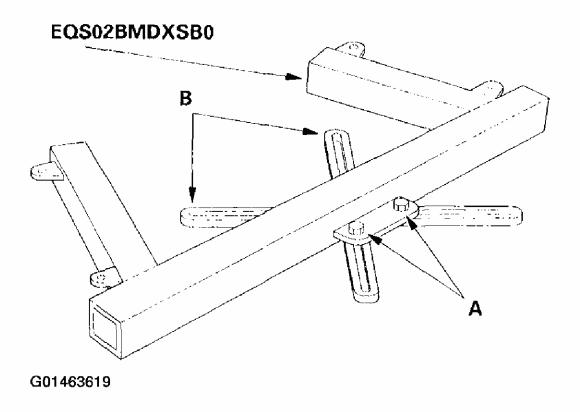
Loosening The Four Bolts Holding The Adjustable Arms Of The Front Subframe Adapter To Its Center Plate Courtesy of AMERICAN HONDA MOTOR CO., INC.
